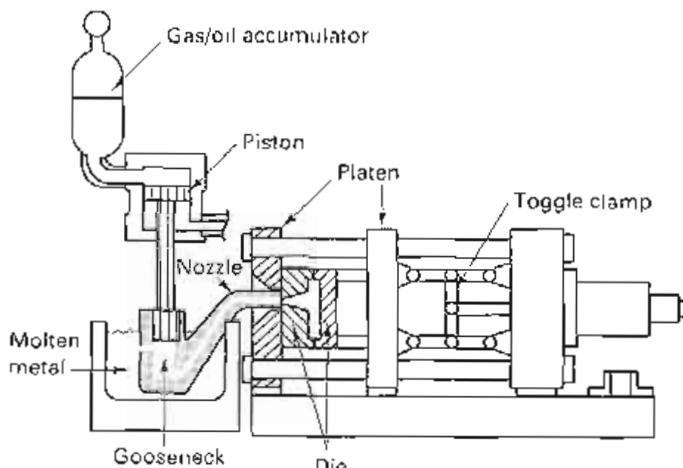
Principal components of a hot-chamber die-casting machine. (Adapted from Metals Handbook, 9th ed., Vol 15, p. 287, ASM International, Metals Park, OH.)
